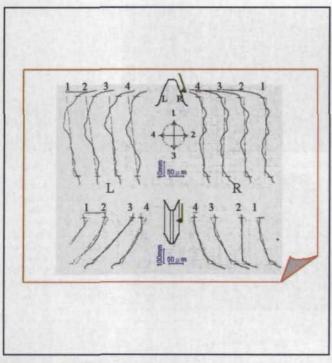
Tooth profile and lead of the same gear from Figure 18 after carburizing in a new process furnace.
